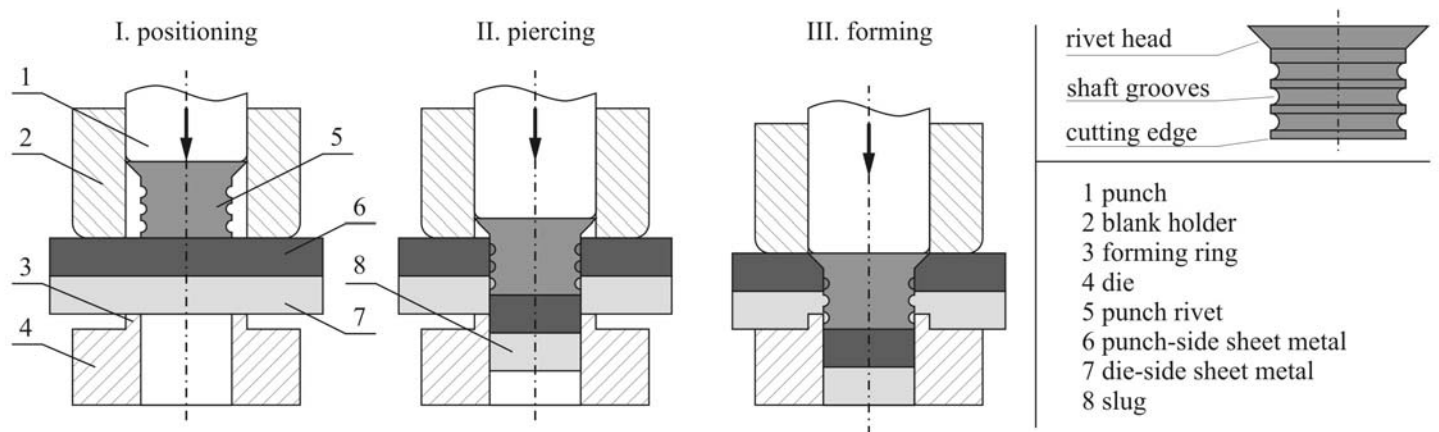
Process steps - joining with self piercing solid rivets (schematic)
